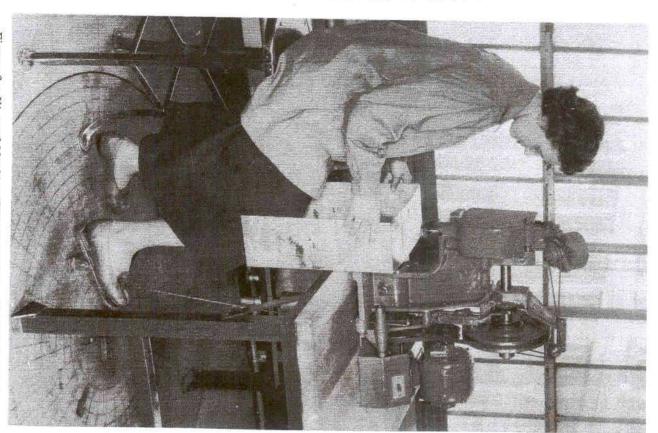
View of Machine With Operator - Horn Extending Over Edge Of Bench
